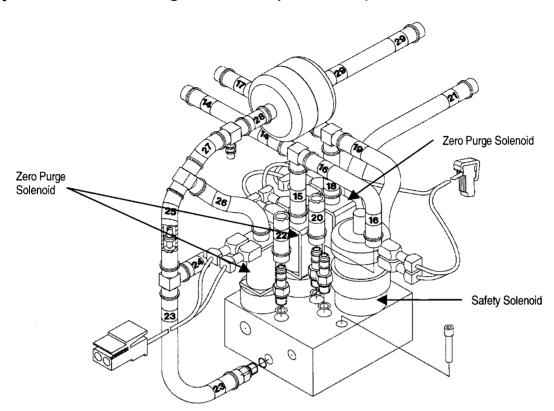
Jet Pump/I/E Hold Block Assembly (P/N 15651)
